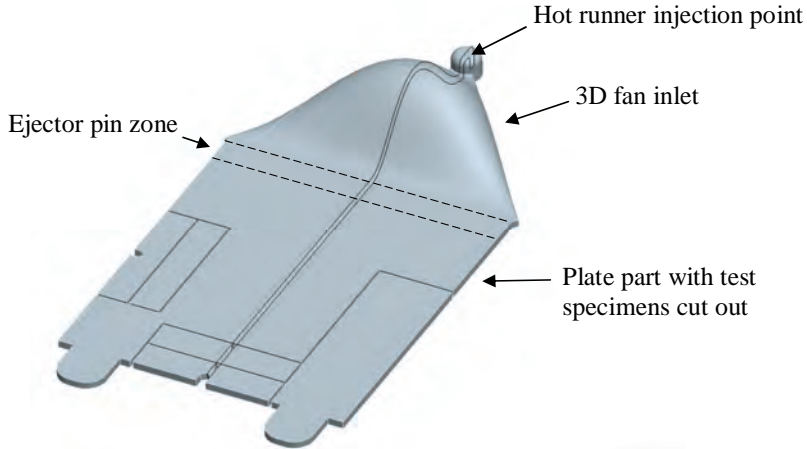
Test blank of configuration 3, with test specimens machined out.
